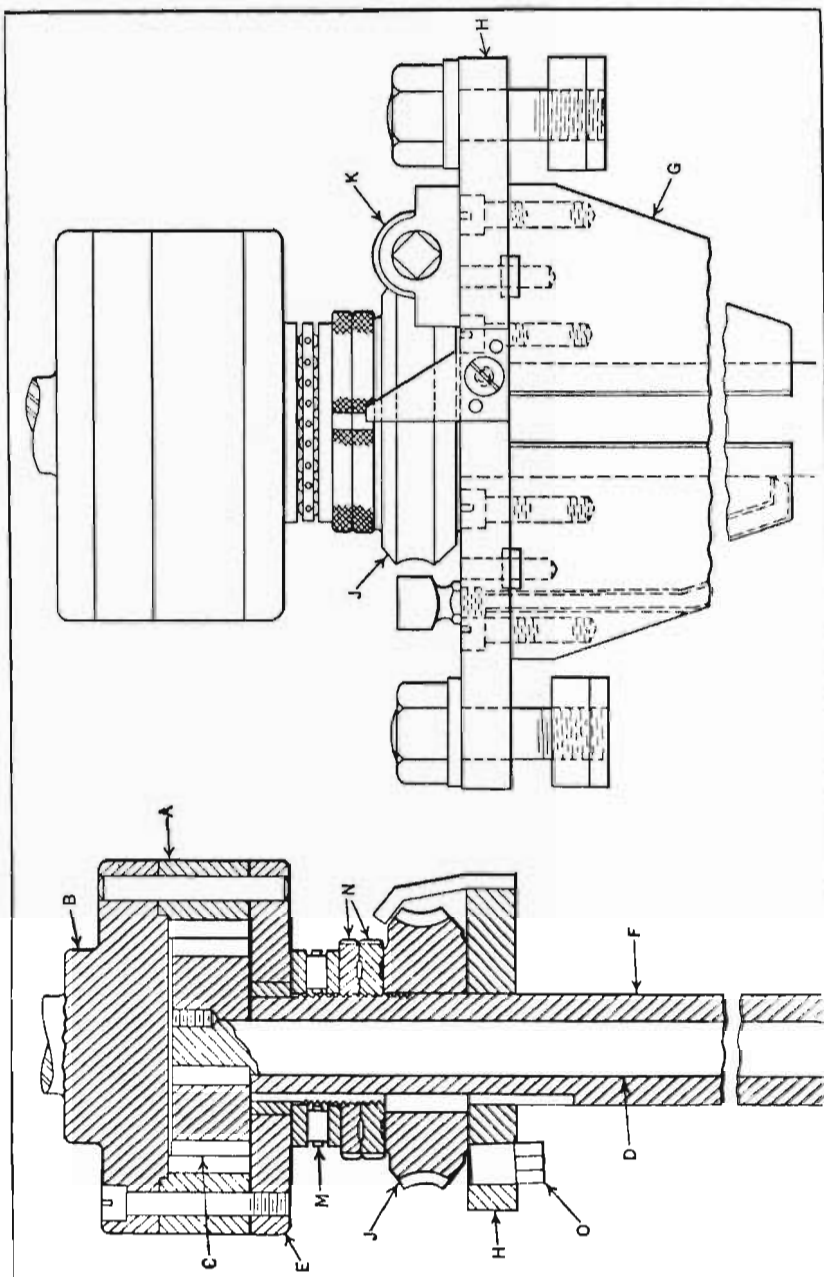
Recessing Tool with Planetary Feed for Milling an Irregular Recess at a Depth of 8 1/8 Inches
